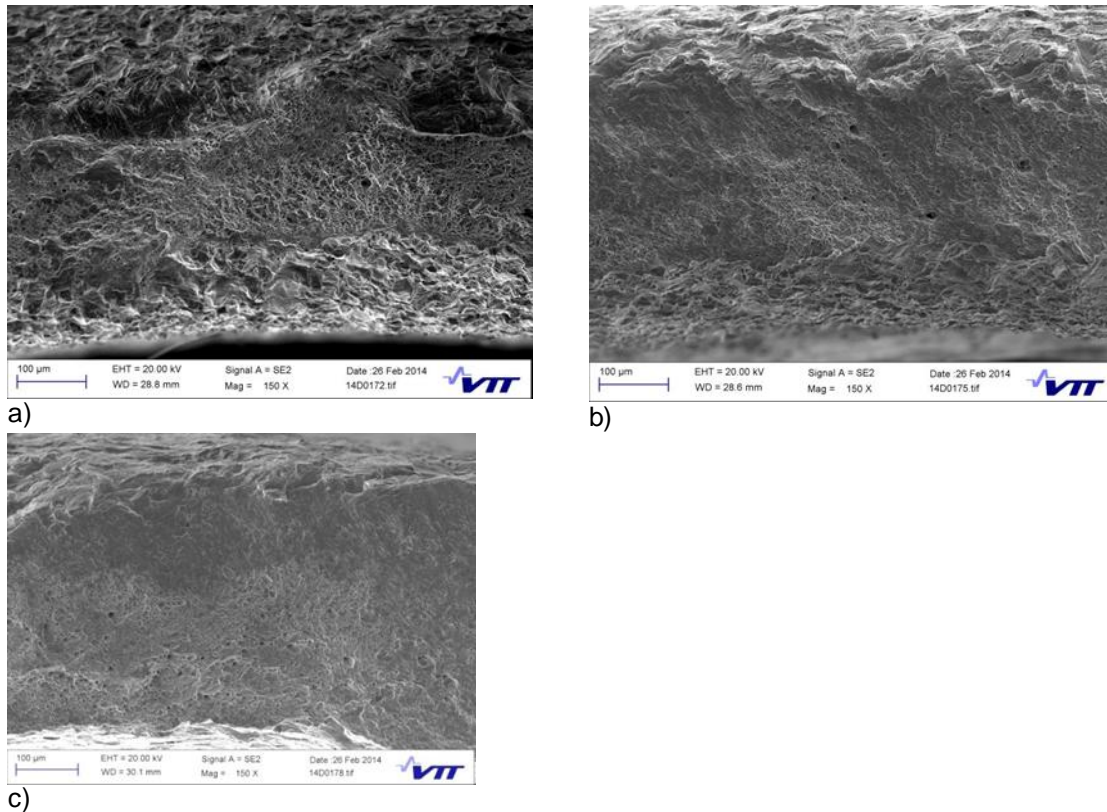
Fully ductile fracture surfaces of specimens cut from the $\sim 8 \times 0.5$ mm 316L tube after the SSRT test in air at 550°C . As-received specimen a), welded specimen (fracture in the middle of the weld) b) and shot peened specimen c).
